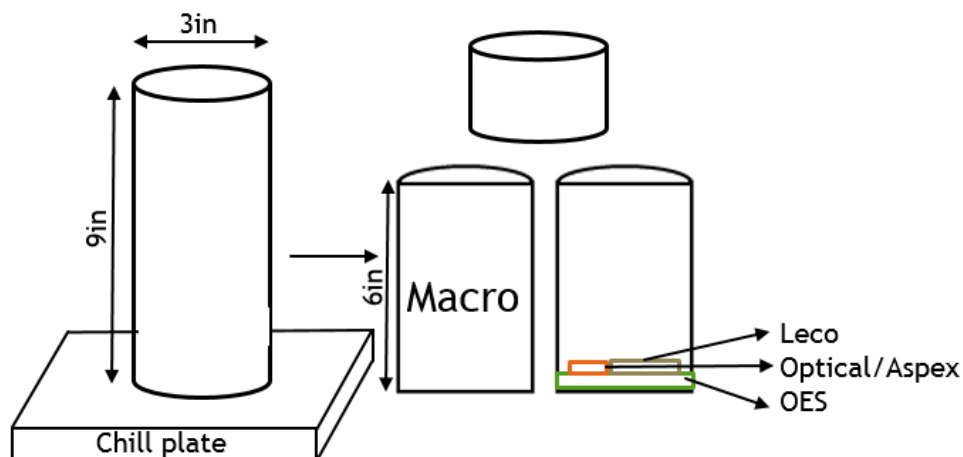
Steels were cast into a 3” diameter cylinder mold on top of a low-carbon steel chill plate and with 1” of hot topping.
